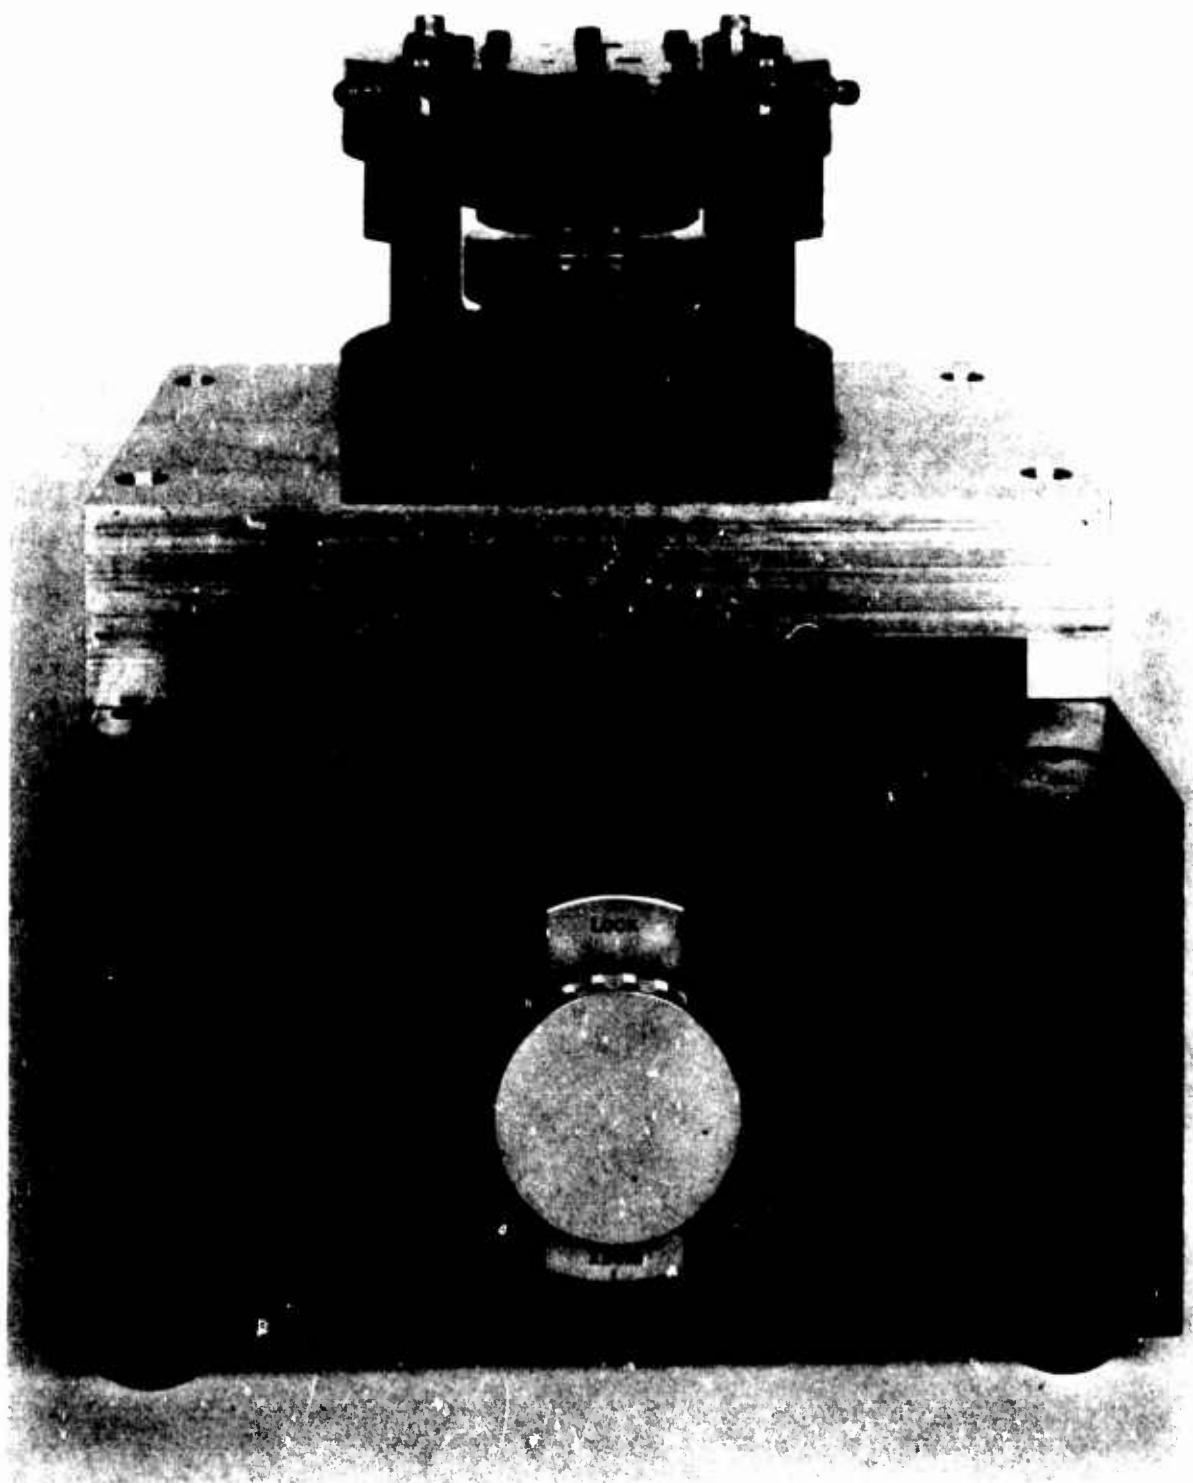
Modified Gertsch Turntable and Test Fixture in Final Form
